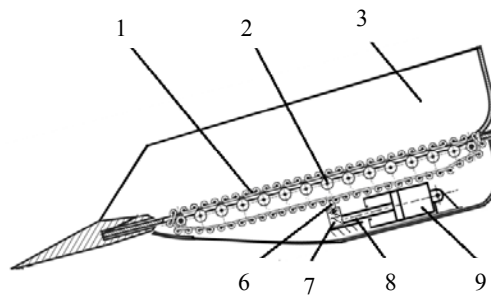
Bucket working body with conveyor bottom in the form of closed belt connected to the drive hydraulic cylinders through locking clamps: 1 — closed belt; 2 — rollers; 3 — side walls; 4 — hydraulic cylinder; 5 — hydraulic cylinder rod; 6 — retainer; 7 — spring
